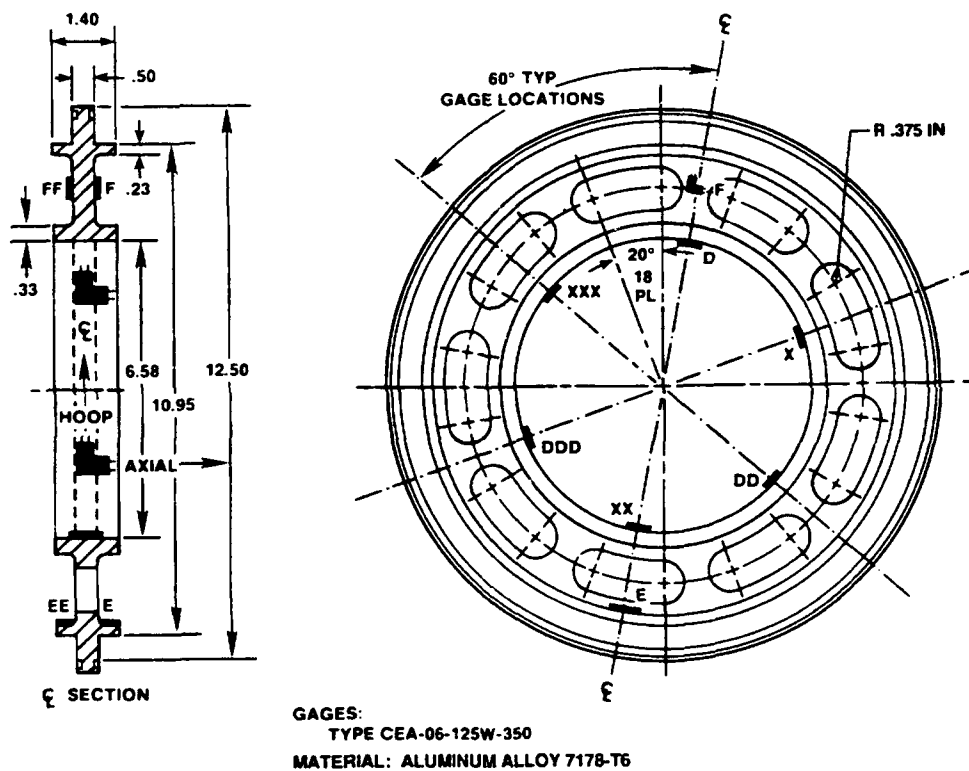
Aluminum ring stiffener DWG 0124008; location of gages.
